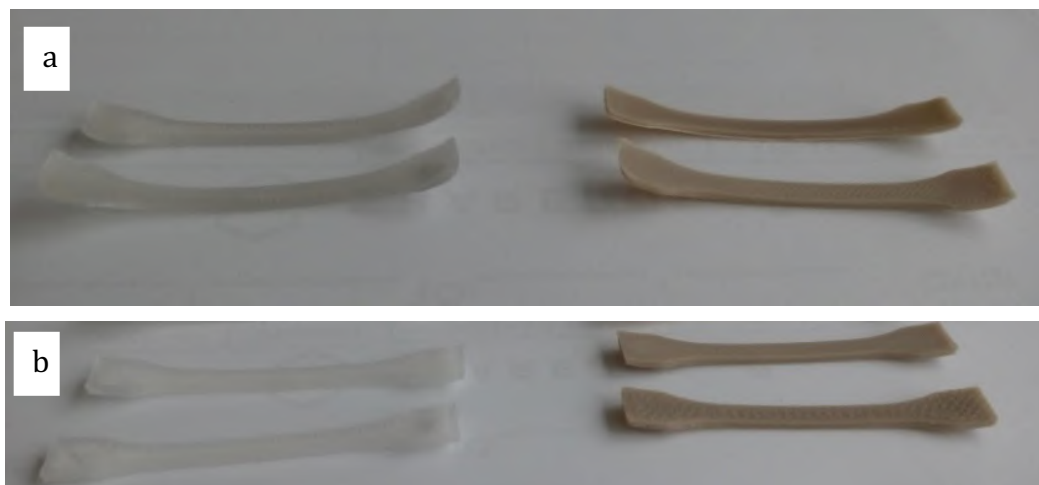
3D printed sample of dumbbell shape of neat HP and K10-HP on a heated bed (a) and adhesive strips coated heated bed (b).
